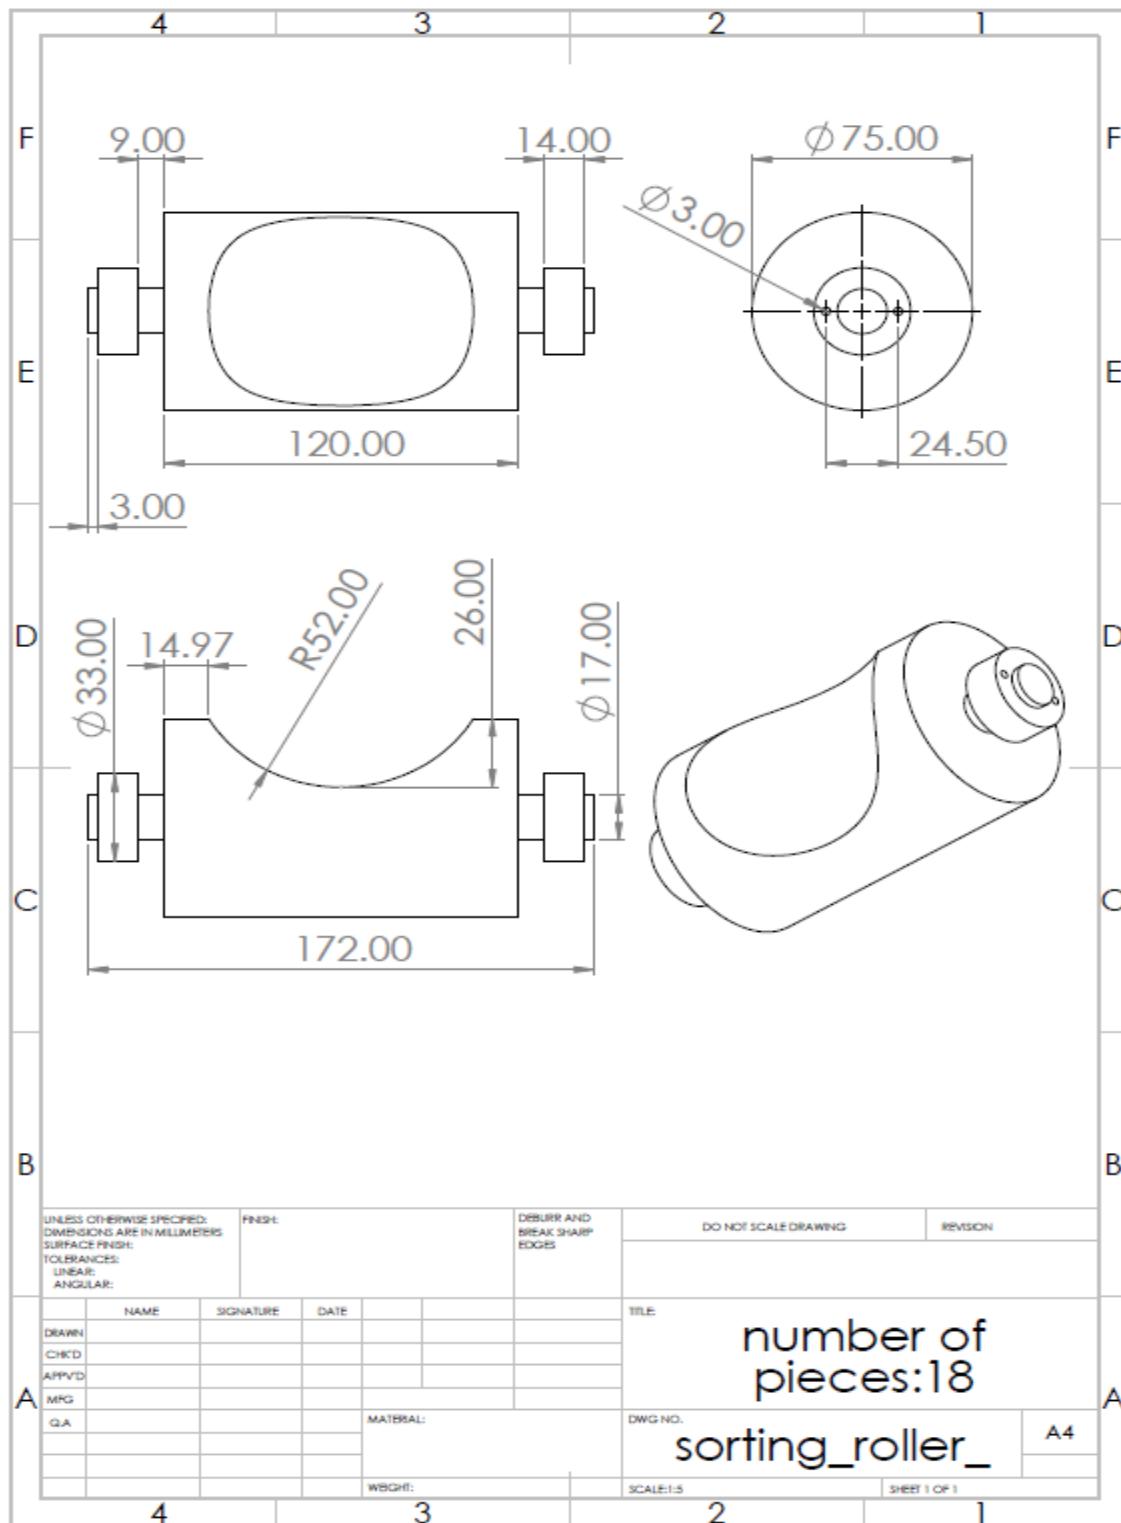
4: Artellon that was done on 5 axis CNC lathe machine
